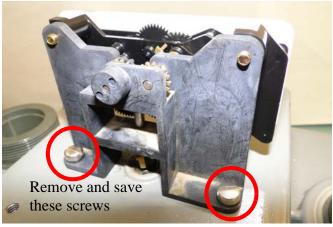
2. Unsupported Index Mounting Bracket Assembly
